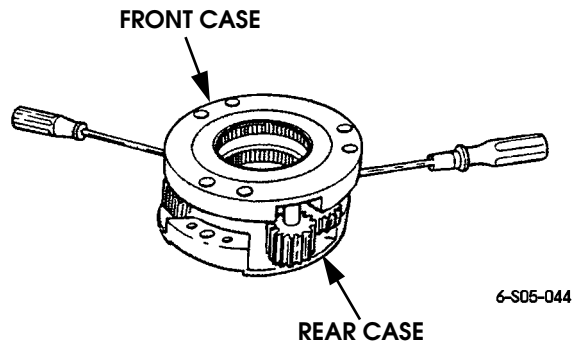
Input/Low Range Planetary Gear Disassembly Sequence
